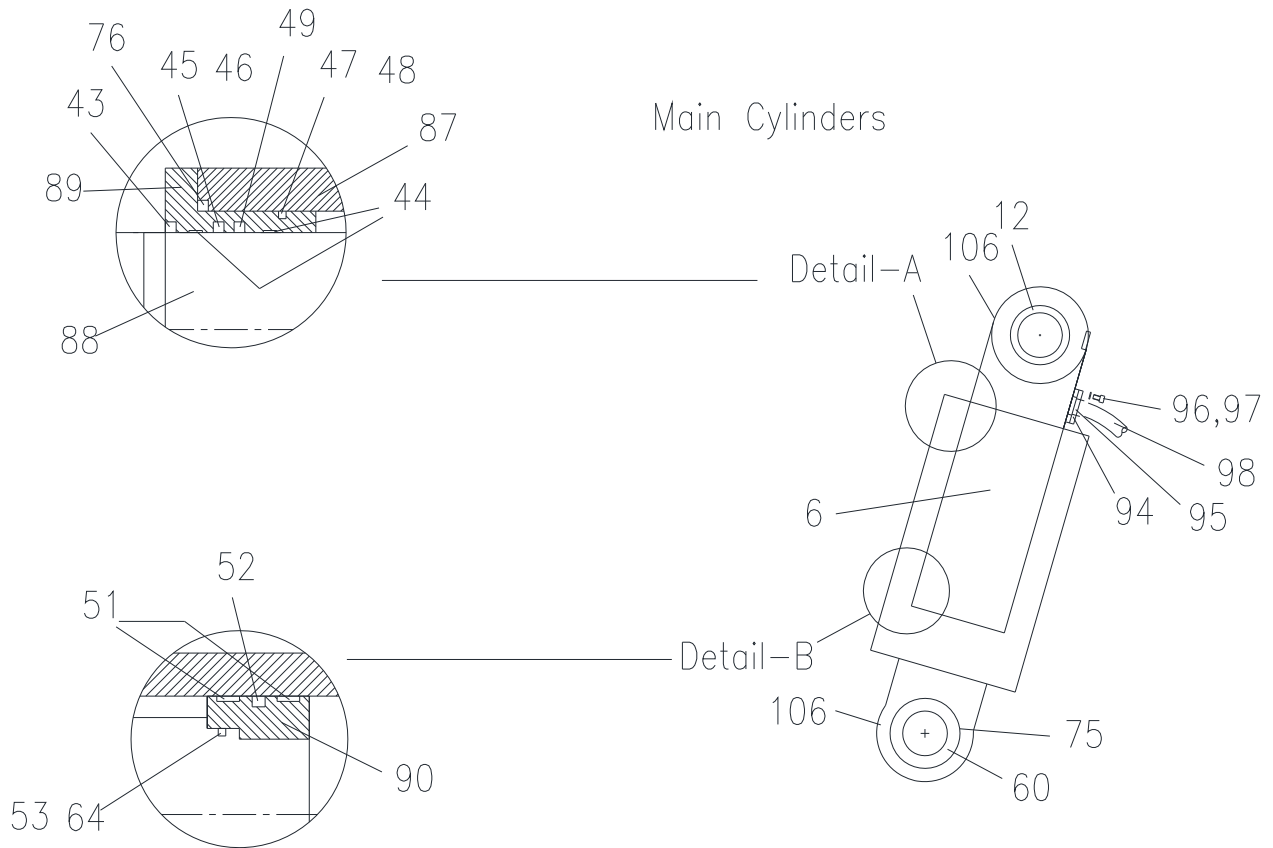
Main Cylinder Assembly – Seals, Packing
